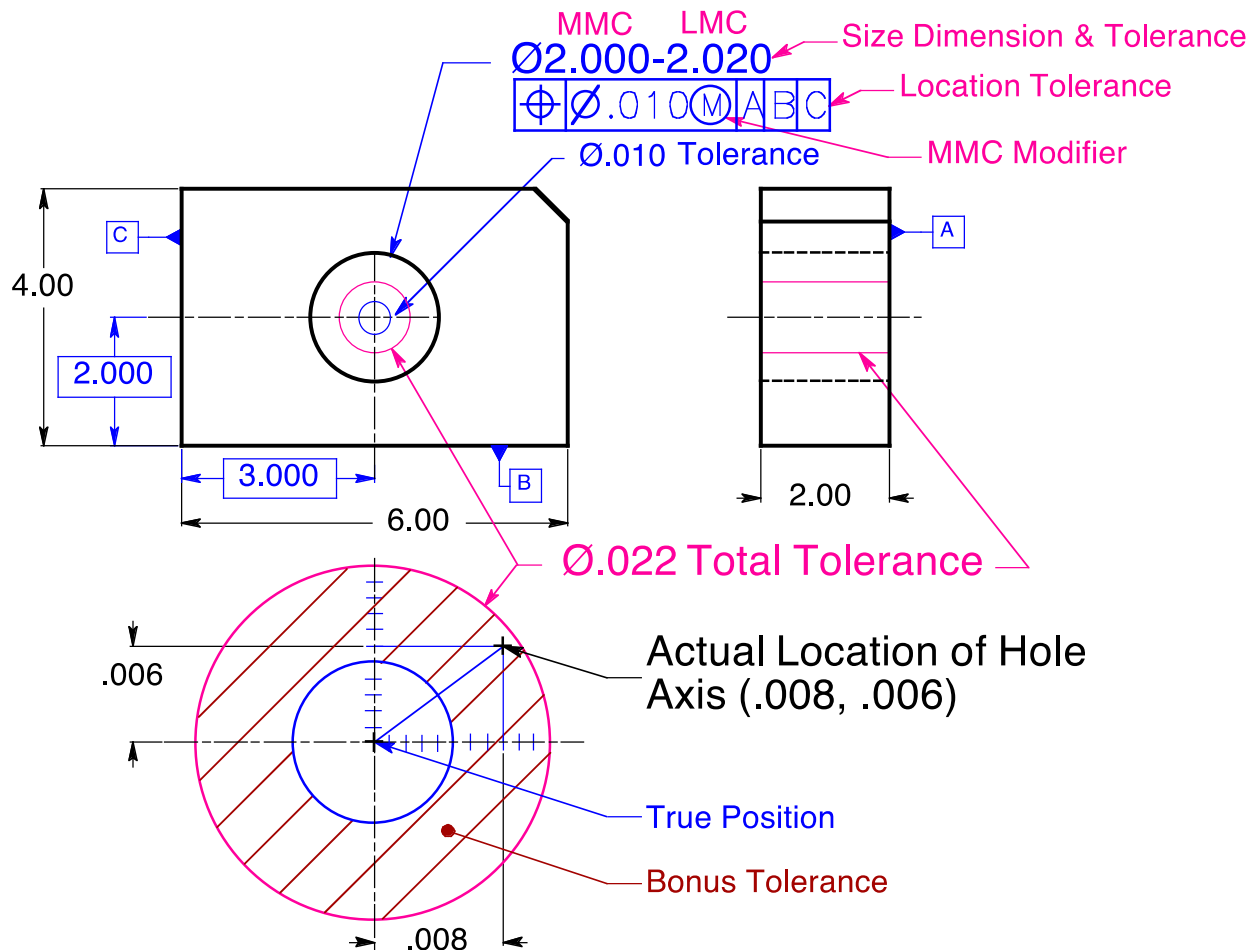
Analysis of the hole location using a theoretical tolerance zone specified at MMC.
